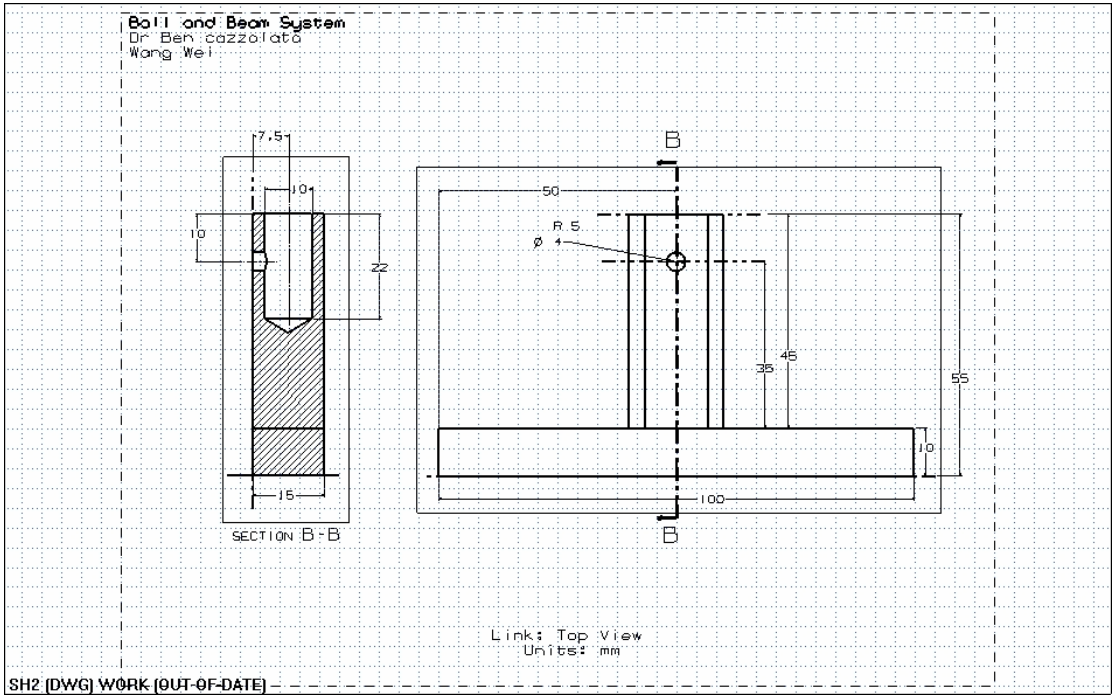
Connect drawing (Top view) in (mm) (Solid Edge V19 2006)
